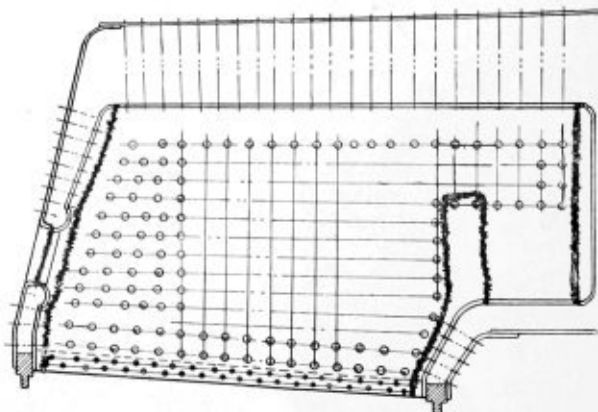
Welded Firebox and Combustion Chamber
